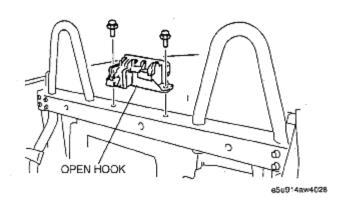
Identifying Open Hook Courtesy of MAZDA MOTORS CORP.
